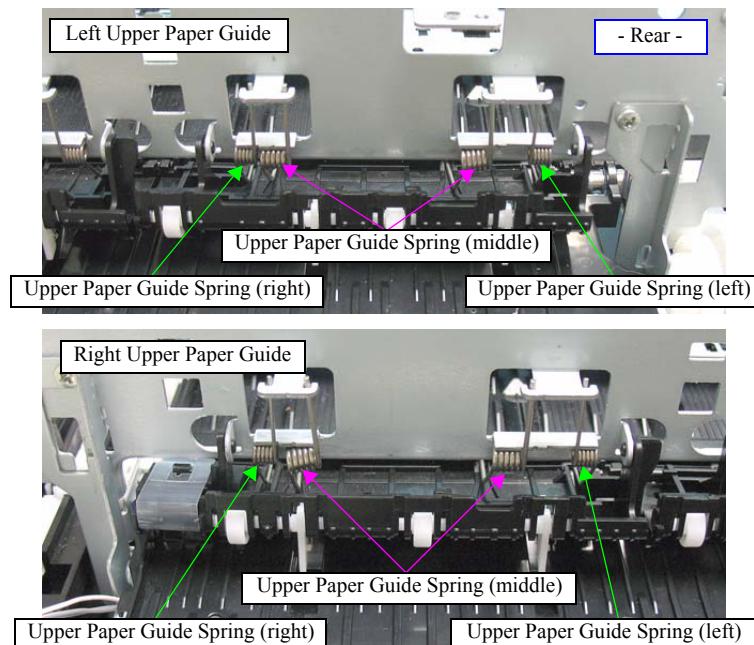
Installing the Left and Right Upper Paper Guides (1)
